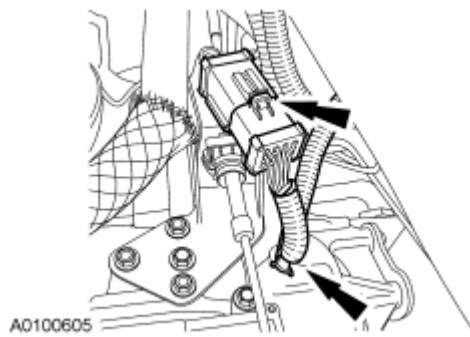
Locating 16-Pin Electrical Connector & Wiring Retainer
